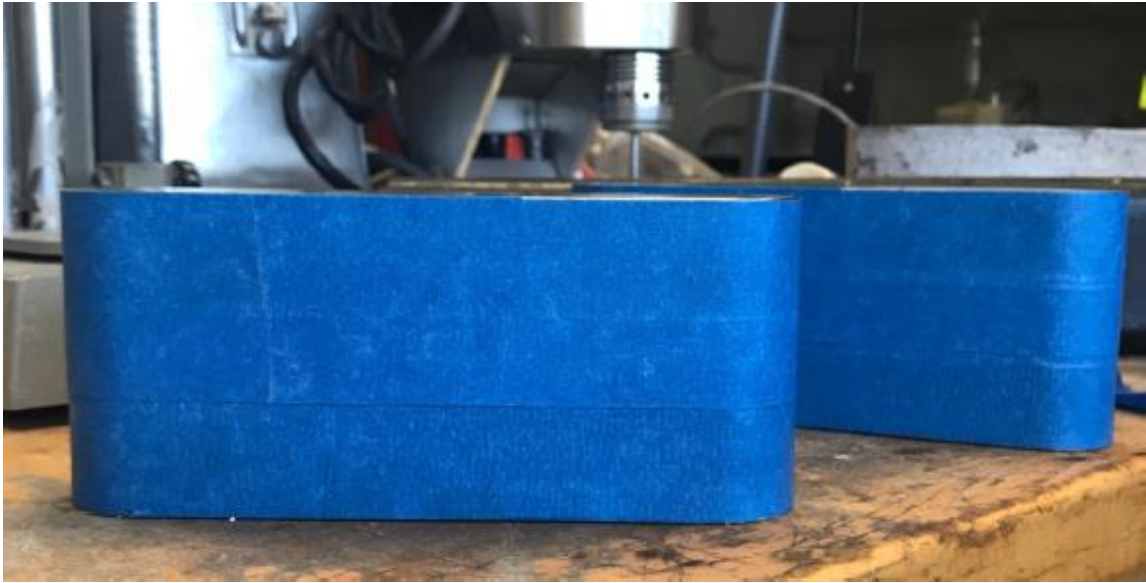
Steel plate with masking tape applied to outside surface (Wylie, 2018)
